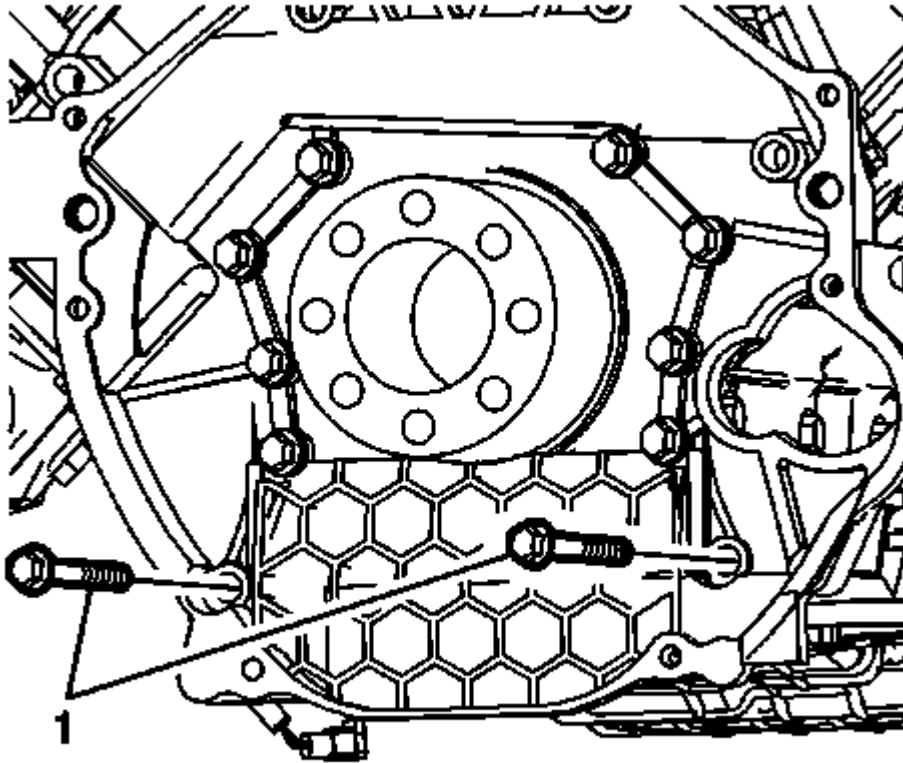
View Of Flywheel Housing To Upper Oil Pan Bolts
